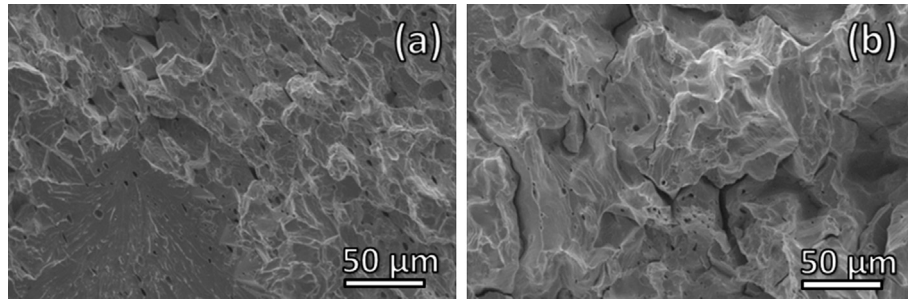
Fracture surfaces of forged and polished tungsten specimens which failed at 480 °C. (a) & (b) correspond to FP1 and FP2 in Fig. 5.
